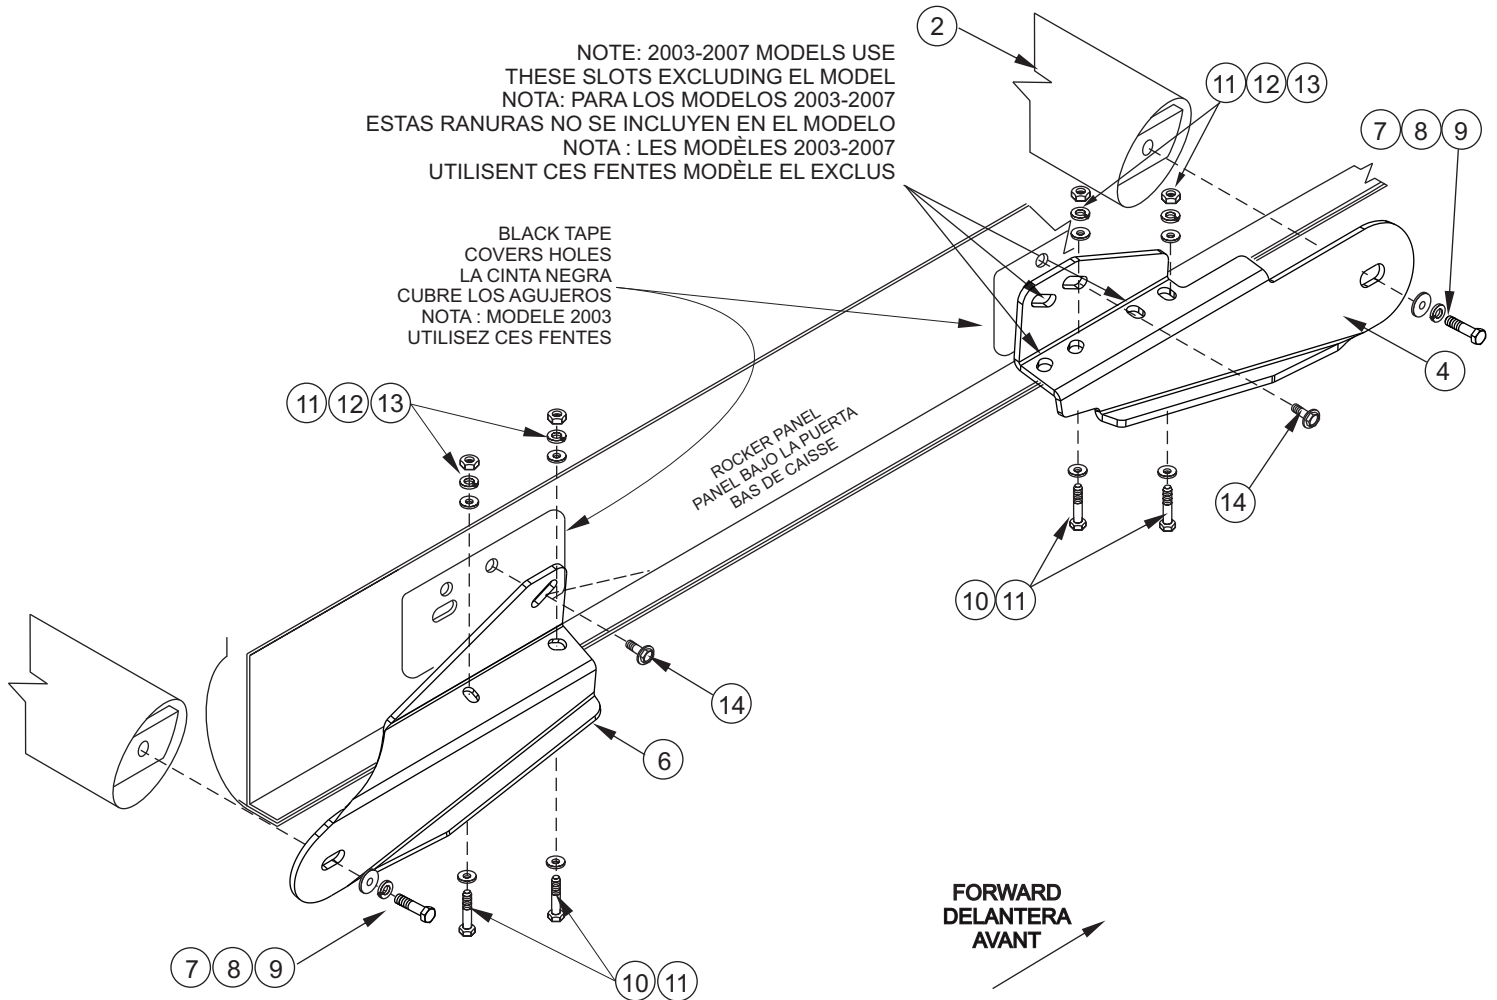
INSTALLATION VIEW OF DRIVER SIDE SHOWN, PASSENGER SIDE OPPOSITE
